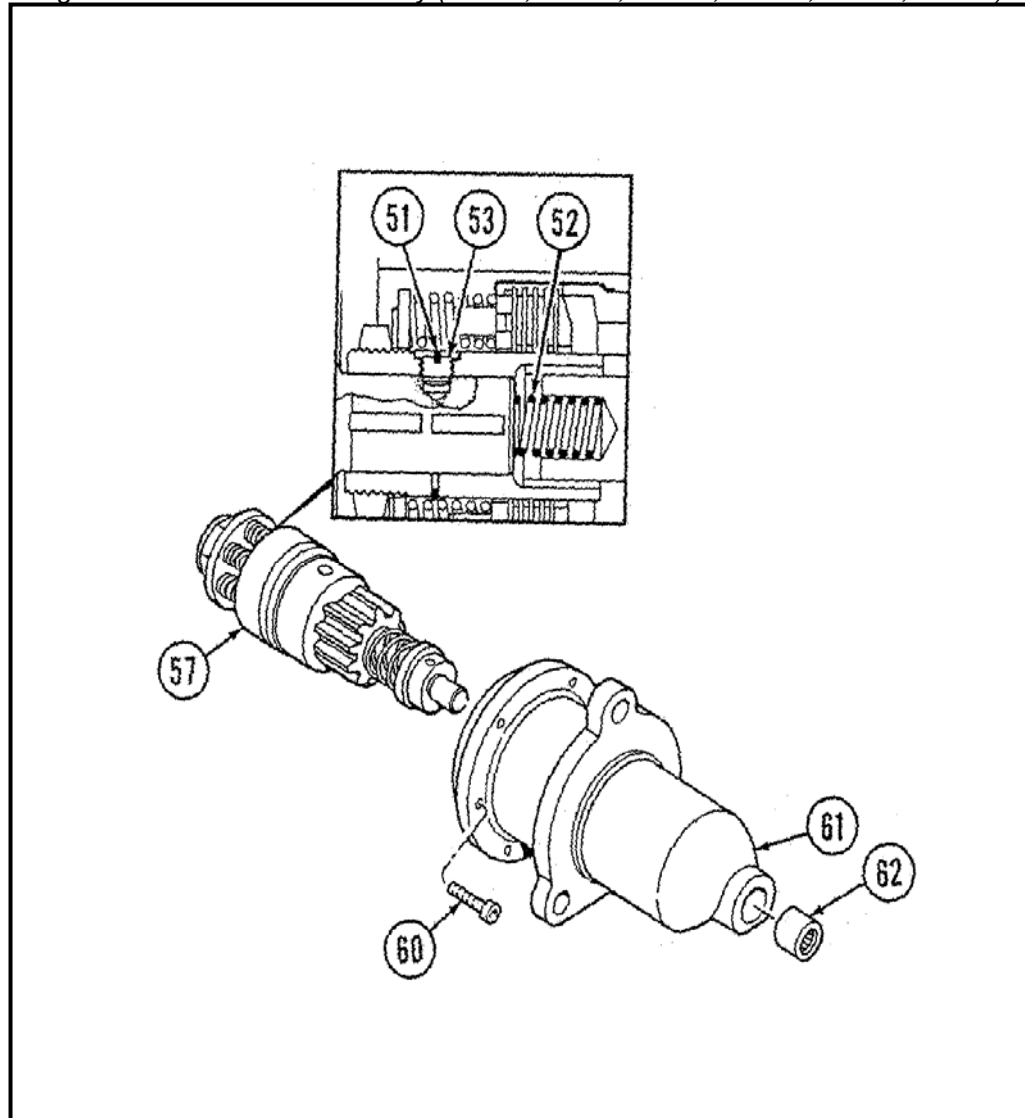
Gearbox Assembly (T112D/T121D LONG MESH)
